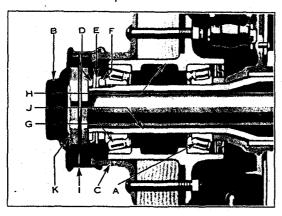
Sectional View of Rear Hub, Showing Bearings.
